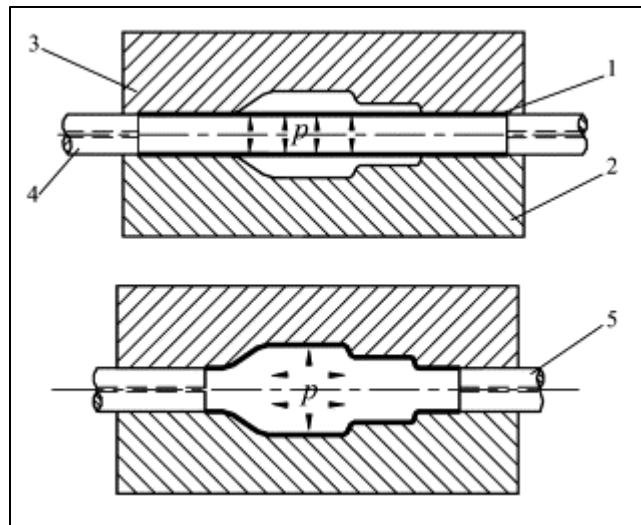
Hydroforming a blank tube using a die and high pressure fluid [25].
